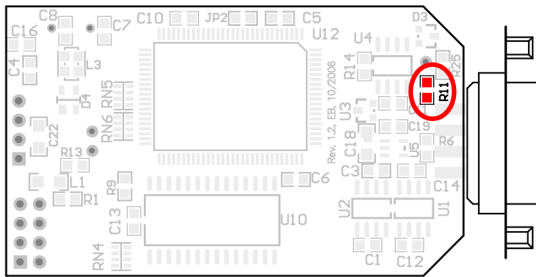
Bottom side of the PCAN-USB opto-decoupled board, solder field R11
